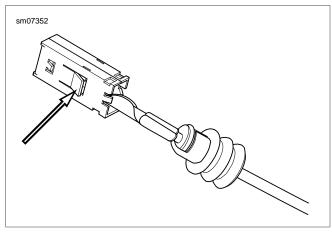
Tangs: Bosch Compact 1.1M Socket Terminal
